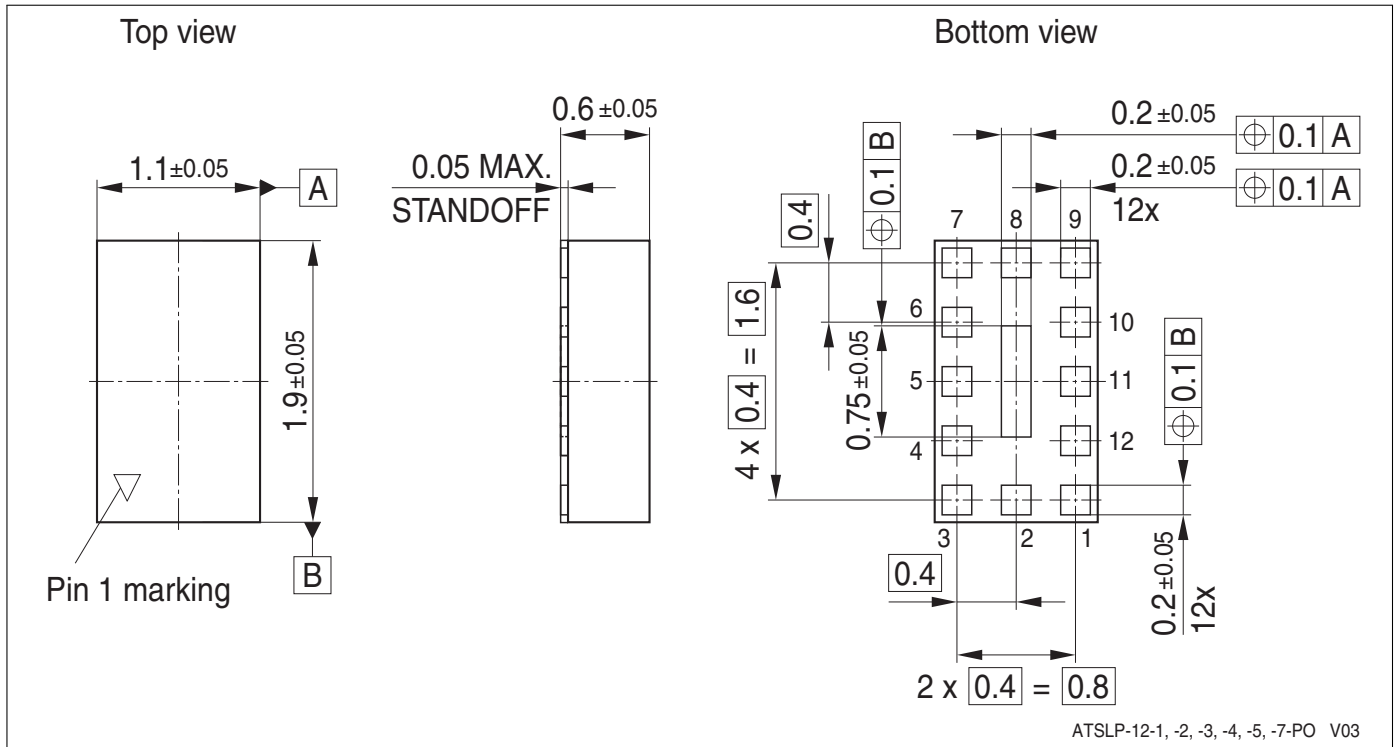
ATSLP-12-4 Package Outline (top, side and bottom views)
